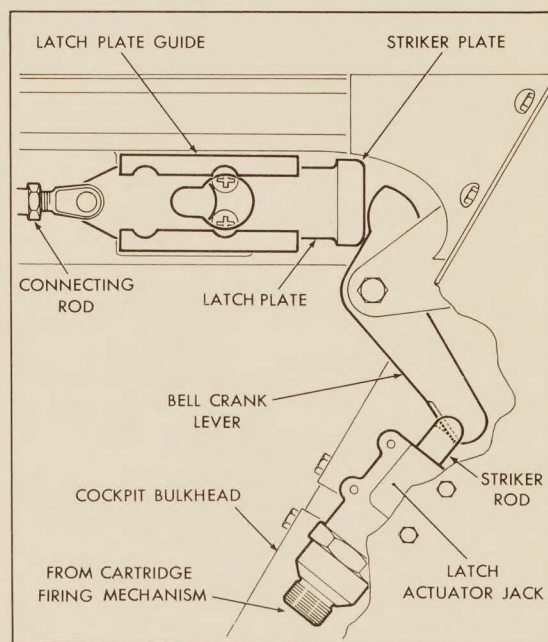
EMERGENCY ACTUATOR - CANOPY LATCH
